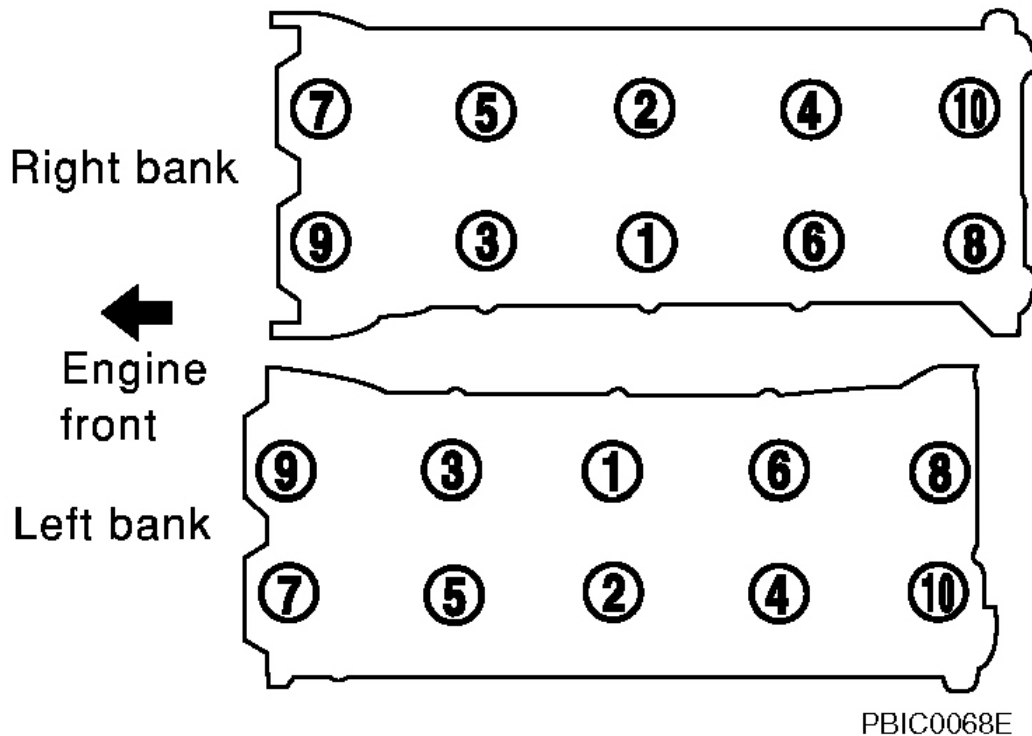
Identifying Cylinder Head To Tighten Cylinder Head Bolts In Sequence
